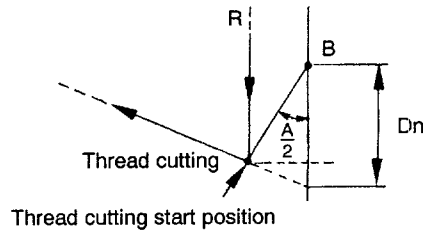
Thread Cutting Start Position for Tapered Thread Designated with “ $A \neq 0$ ”
